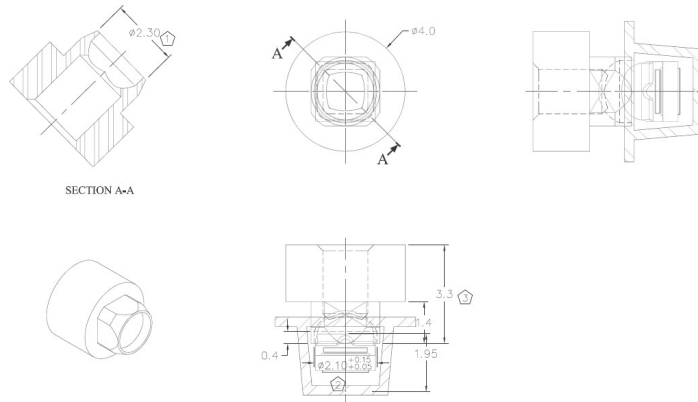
Nozzle design for Yamaha YS12. All dimensions are in millimeters
